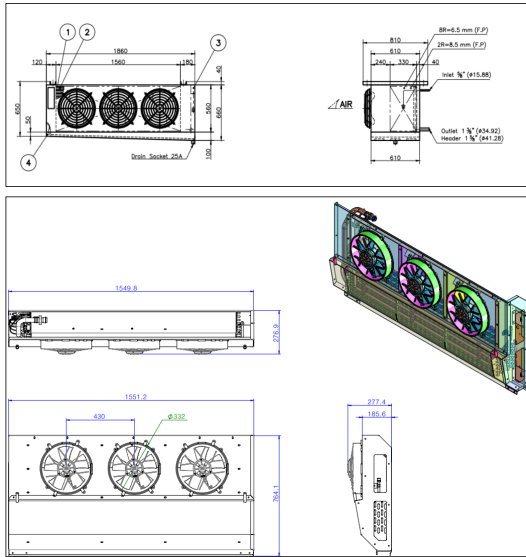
Unit cooler drawing(1stdesign, 2nddesign).
